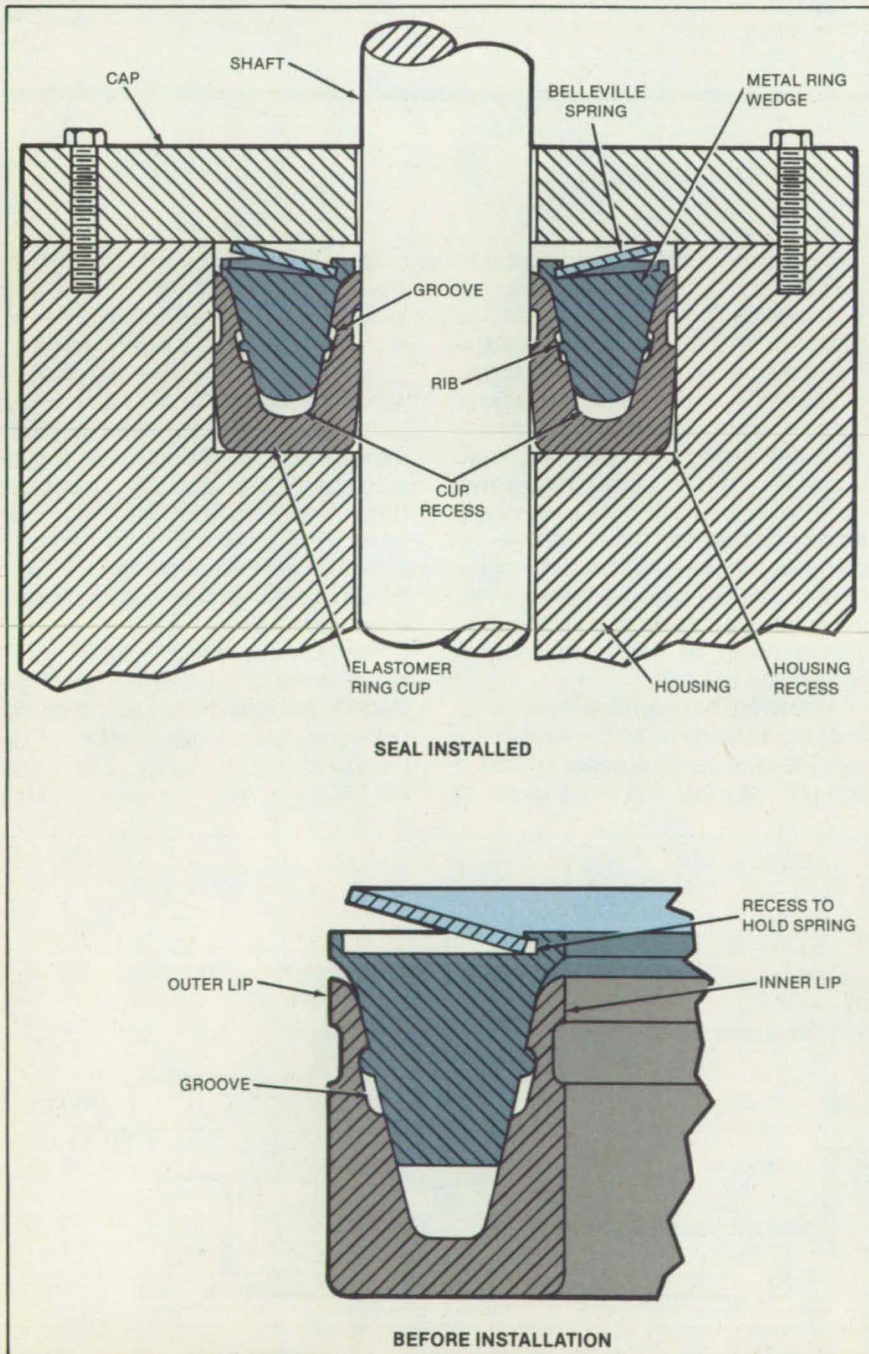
The Shaft Seal includes an elastomeric ring cup that is held against the shaft and housing by a sprung ring wedge.
